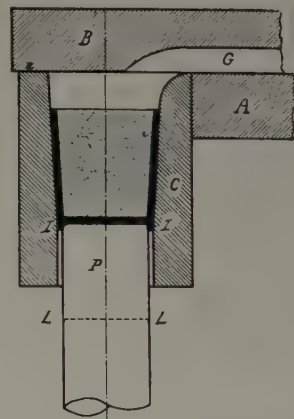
CASTING PRINCIPLE OF PACK MACHINE. (FROM *Metal Industry*.)
